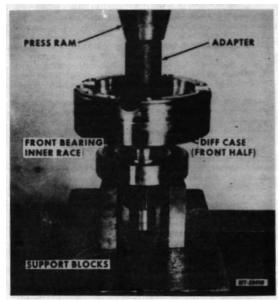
Pressing Front Bearing On Inter-Axle Diff Case Front Half.
